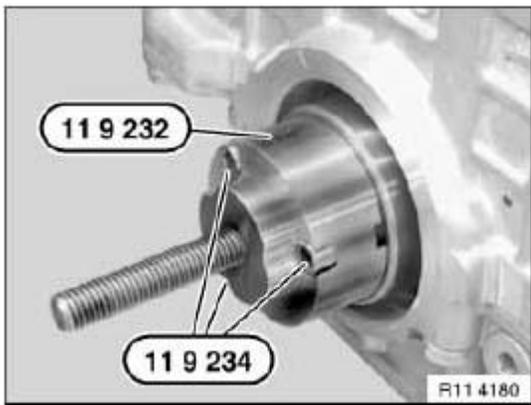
Identifying Special Tools (11 9 234 And 11 9 232)
